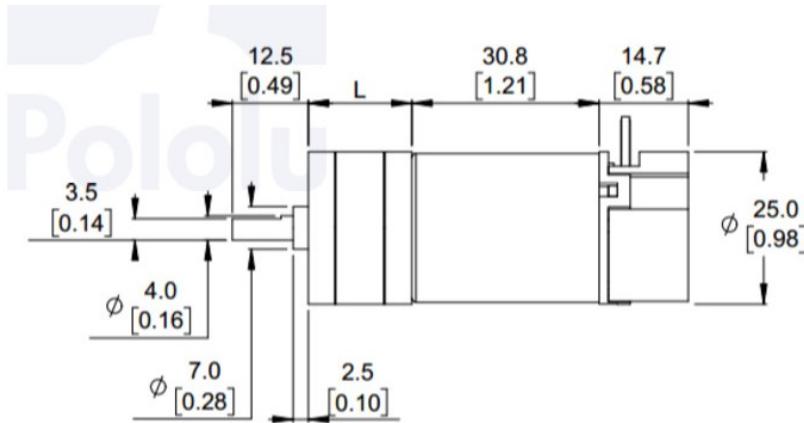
Dimensions of metal gearmotors with encoders. Units are mm
